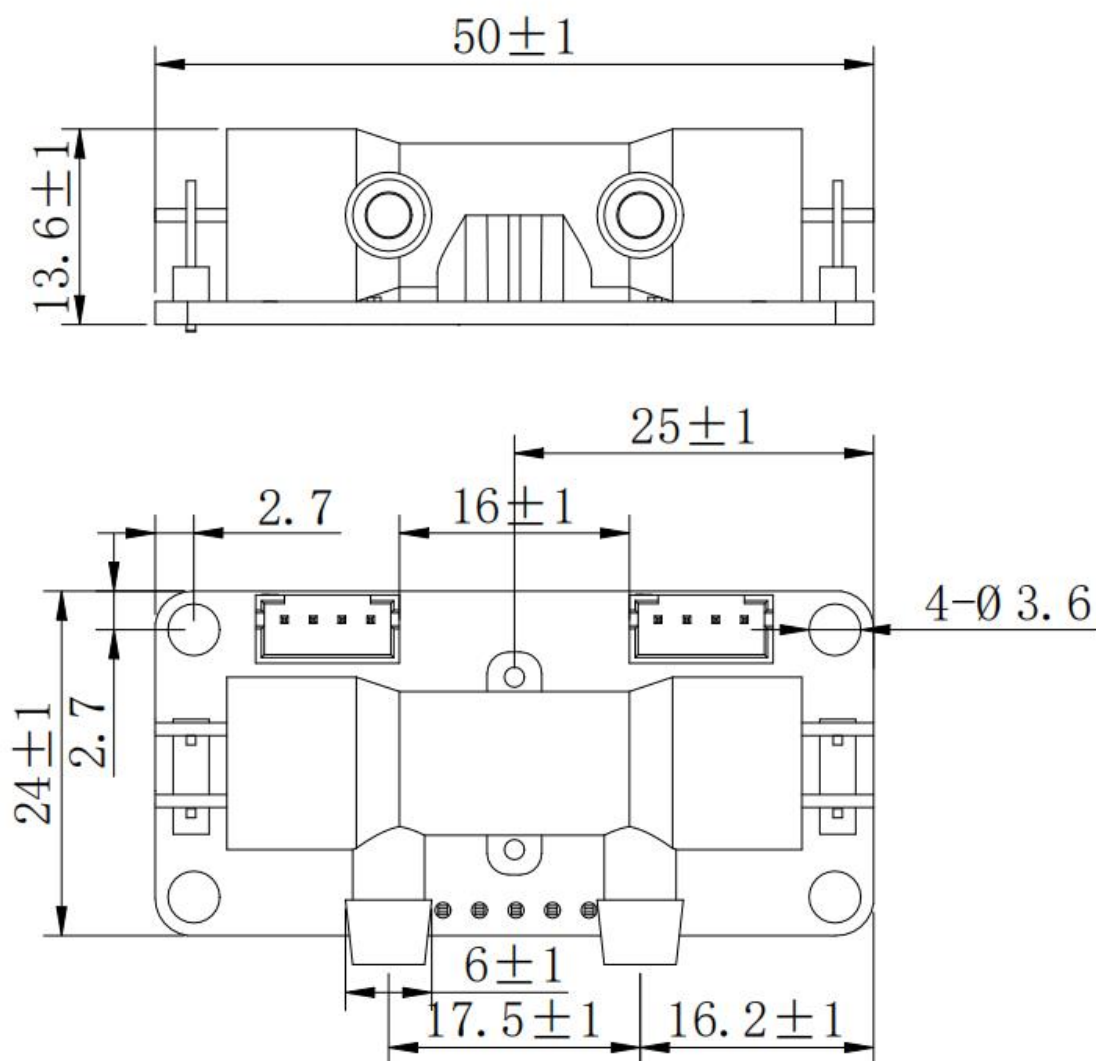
AOF2000 dimension drawing (unit: mm, tolerance: ± 1 mm)
